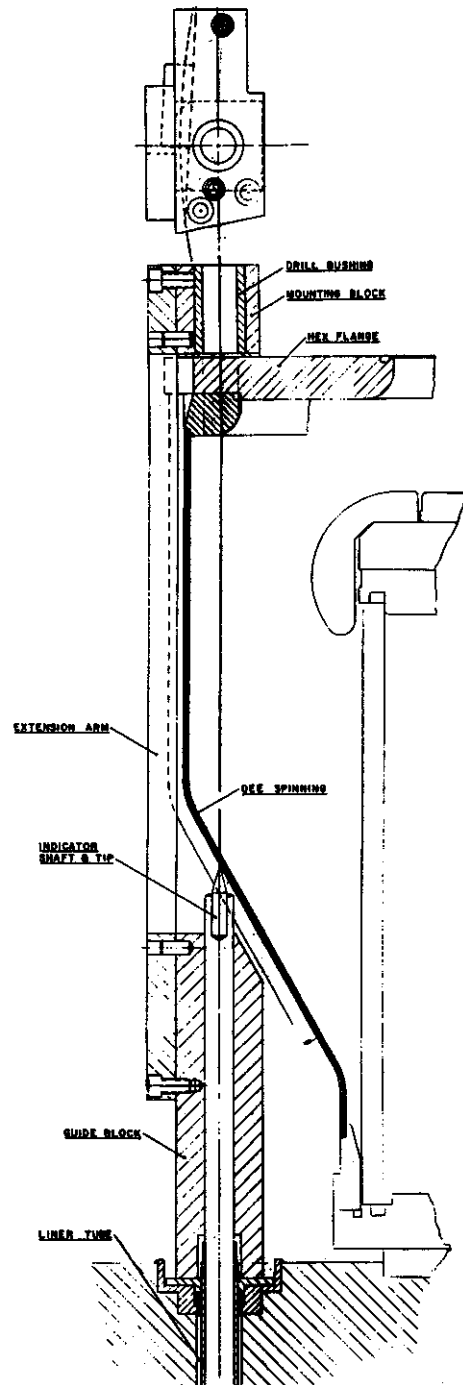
The fixture used for locating the hole in the dee stem spinning. The other end of the indicator shaft was at the median plane so it could be tapped with a hammer to mark spinning with the sharpened point. The drill bushings provided alignment of the clearance hole and the two threaded holes for mounting the air cylinder on the hex flange.
